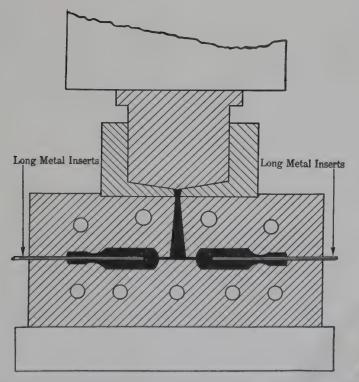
Transfer molding. (Courtesy of Bakelite Corporation.)
